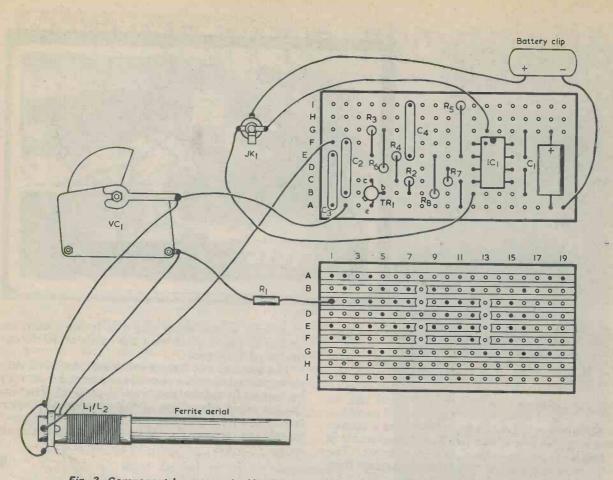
Component layout on the Veroboard panel and the general wiring of the receiver
